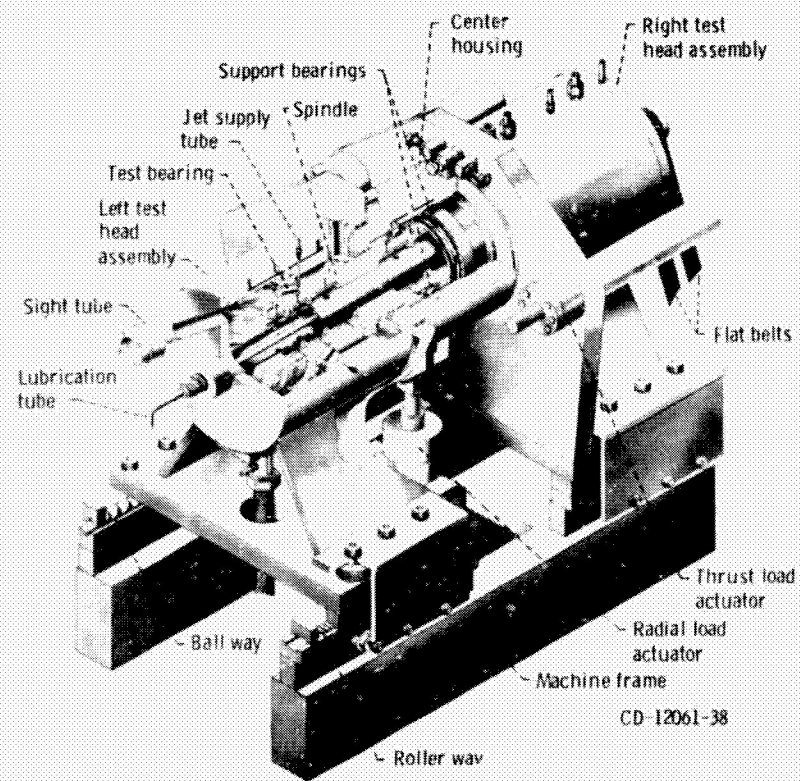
Pictorial view of high-speed tapered roller bearing test rig.
